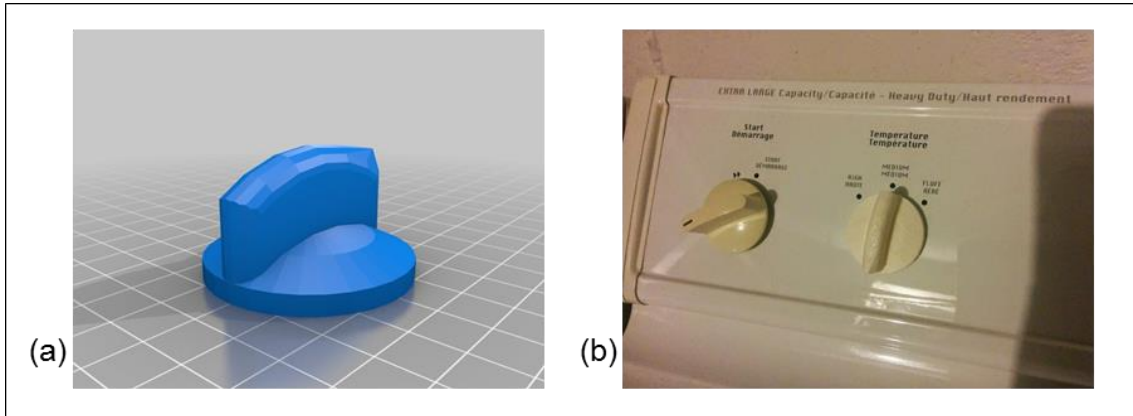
Washing machine knob design and its application. (a) Knob design in 3D model. (b) Two knobs installed in a washing machine; the left is an original knob; the right is fabricated by a desktop 3D printer. Both figures were adapted from (Thingiverse, 2015).
